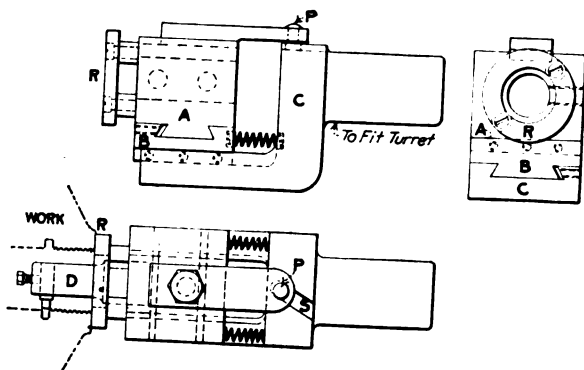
RECESSING TOOL FOR AUTOMATICS
